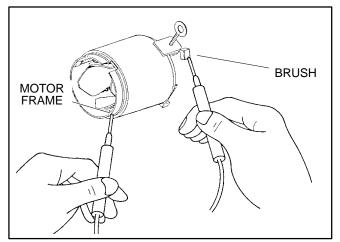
CHECKING MOTOR FRAME WINDINGS
